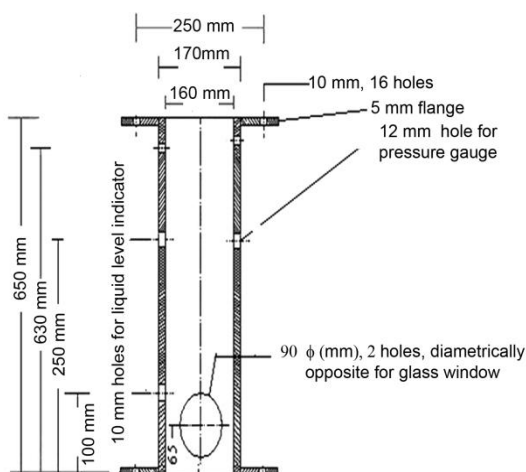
Cross-sectional view of boiler vessel with various holes for fitting accessories with dimensions and position of holes.
